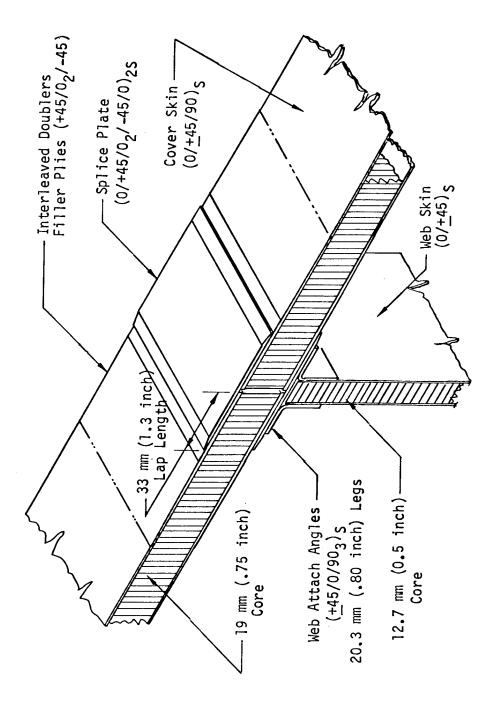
FINAL DESIGN TYPE 1 BONDED JOINT
